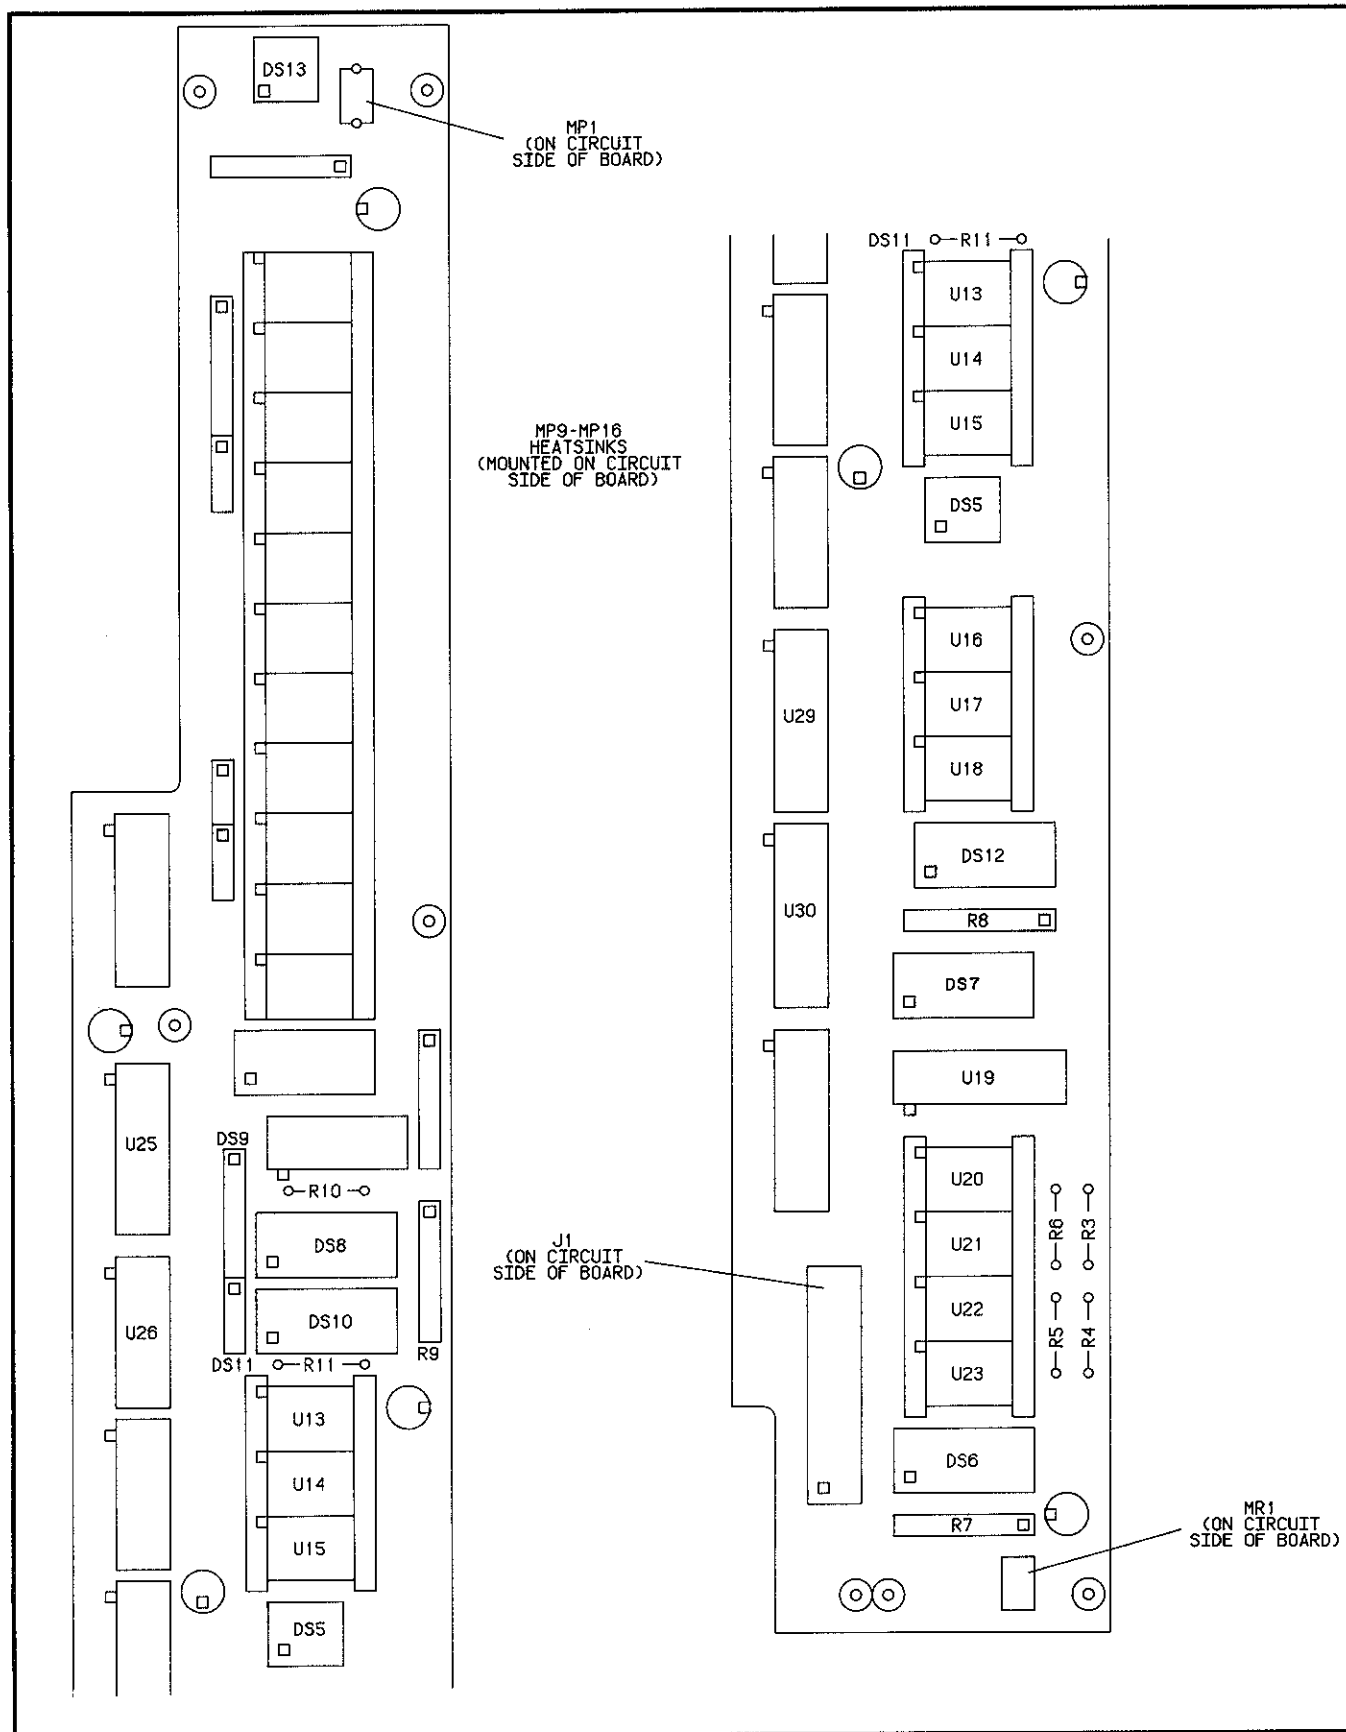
P/O A1A1 Display Assembly Component Locator
